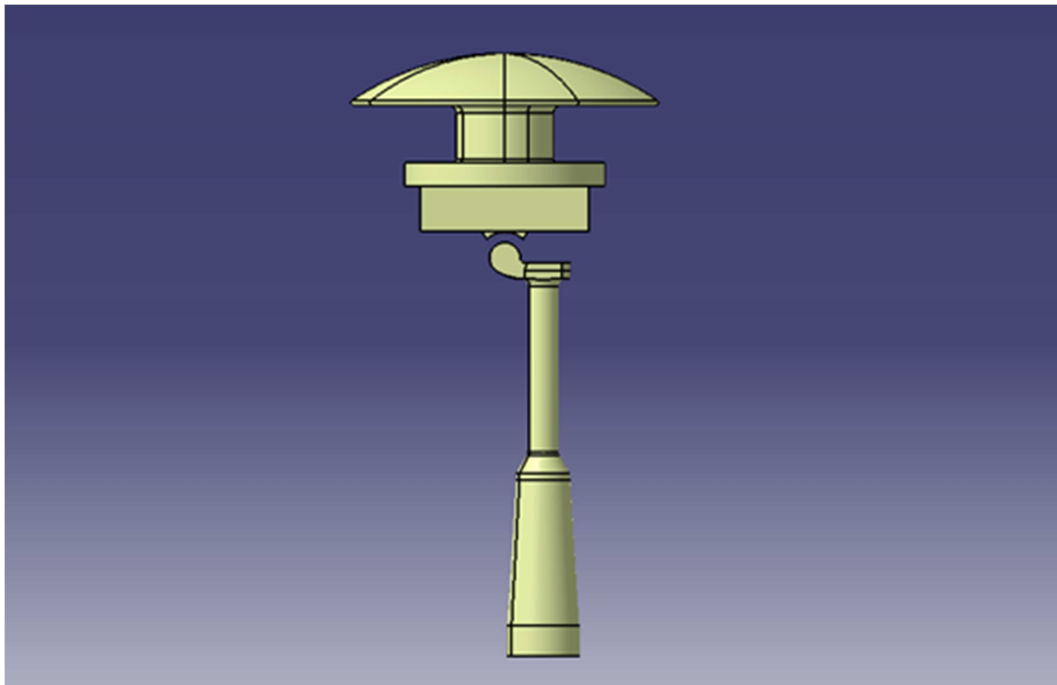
Side view of the CAD model of the beanie supporting system.
